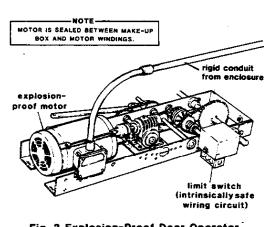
Explosion-Proof Door Operator (Model L - Shown as Typical)
